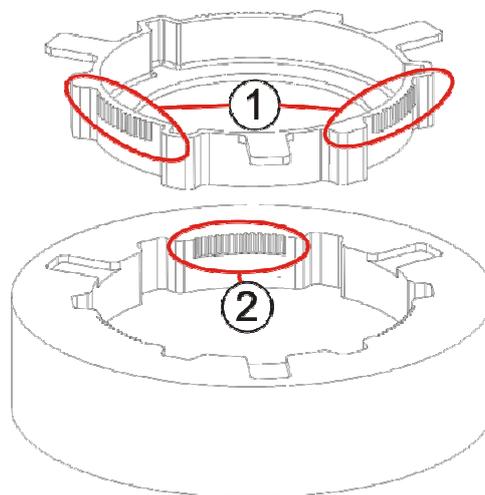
Demonstrator part of the Transregio 73 tool and workpiece; 1,2 critical areas
